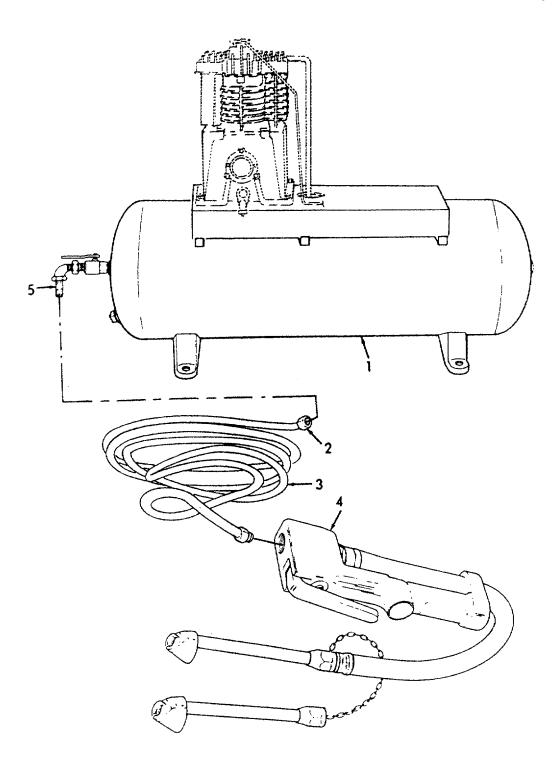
Hose and Inflator Gage, Removal/Installation.
